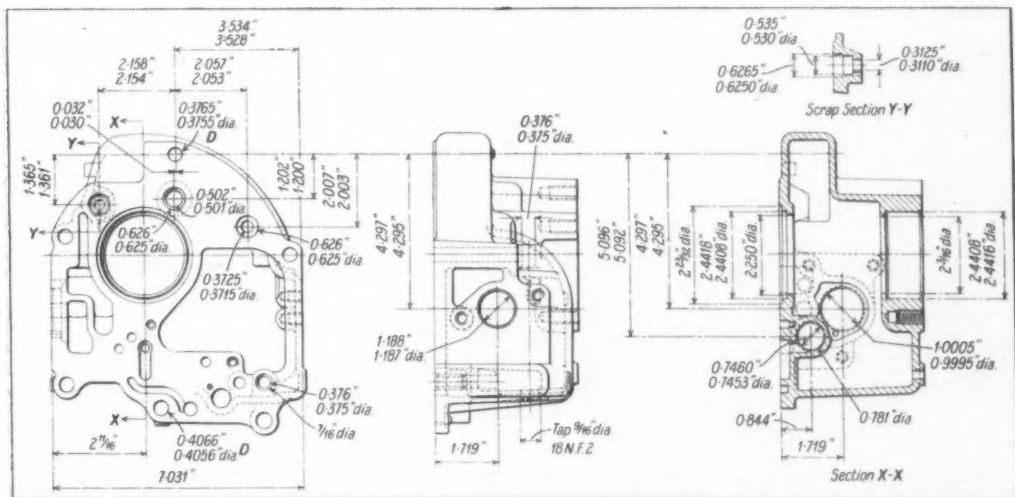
Elevation and Sectional Views of the Rear Extension Casting for the Borg-Warner Transmission, with the Principal Dimensions. The Dowel Holes D, are Employed for Location Purposes
